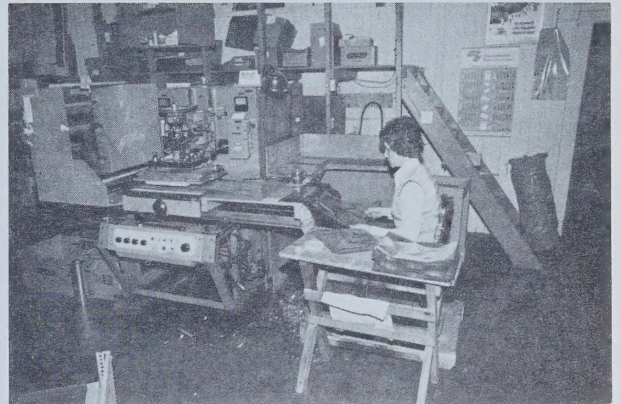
(c) Typical Sewing Machine Type Sealers with Operator in Position
